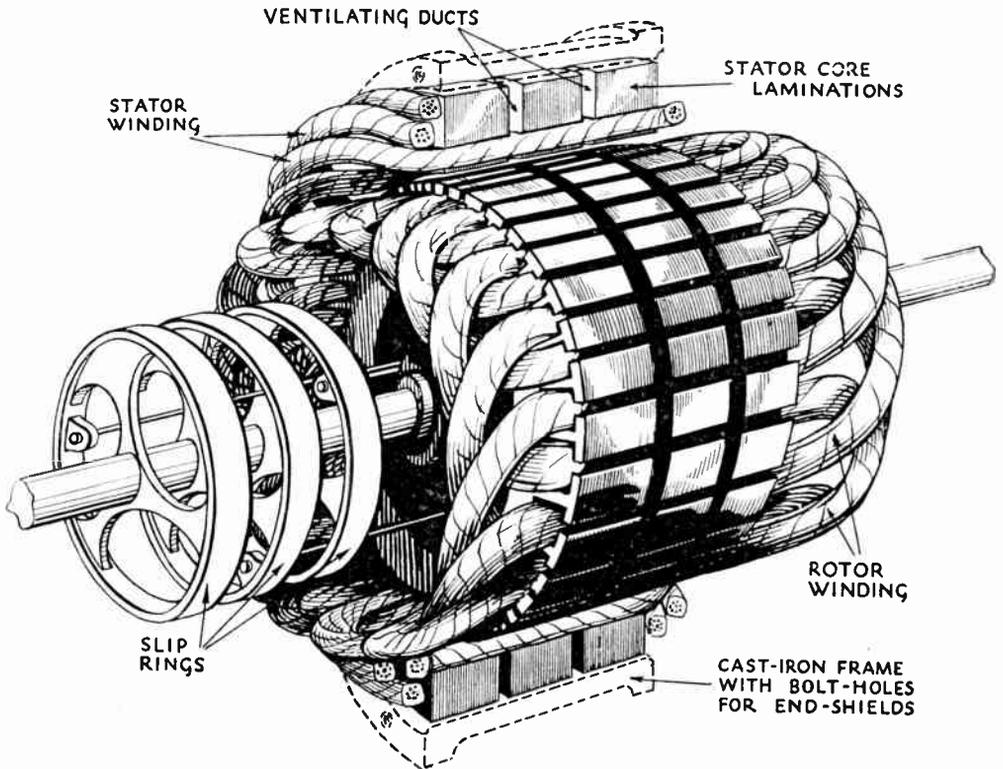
A.—GENERAL ARRANGEMENT OF STATOR AND ROTOR OF A SLIP-RING MOTOR.
